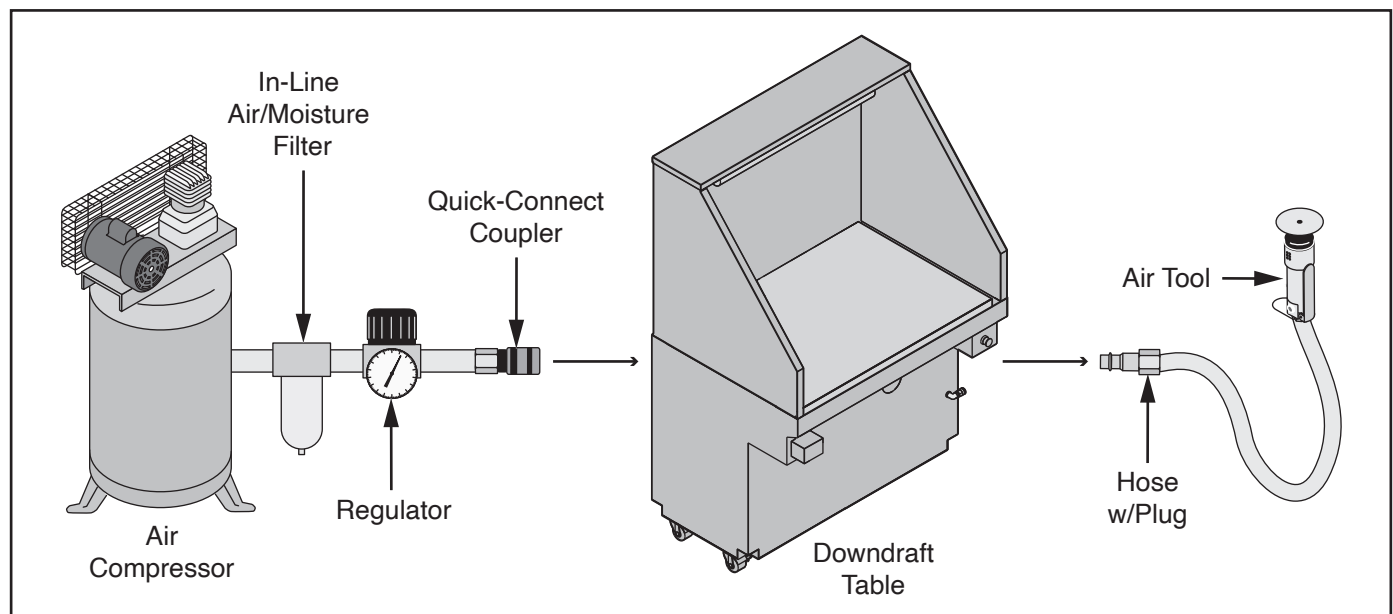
Typical compressed air supply setup for downdraft table and optional air tool.
